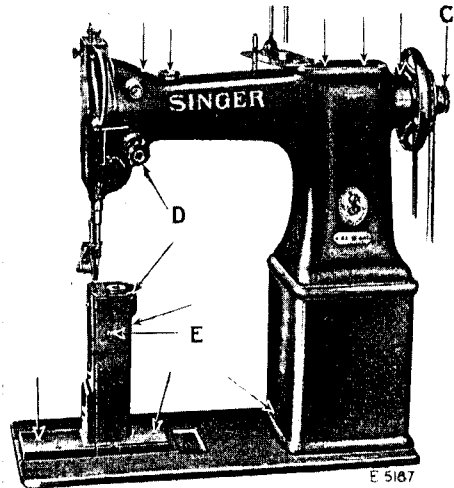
OILING POINTS AT THE FRONT OF THE MACHINE
